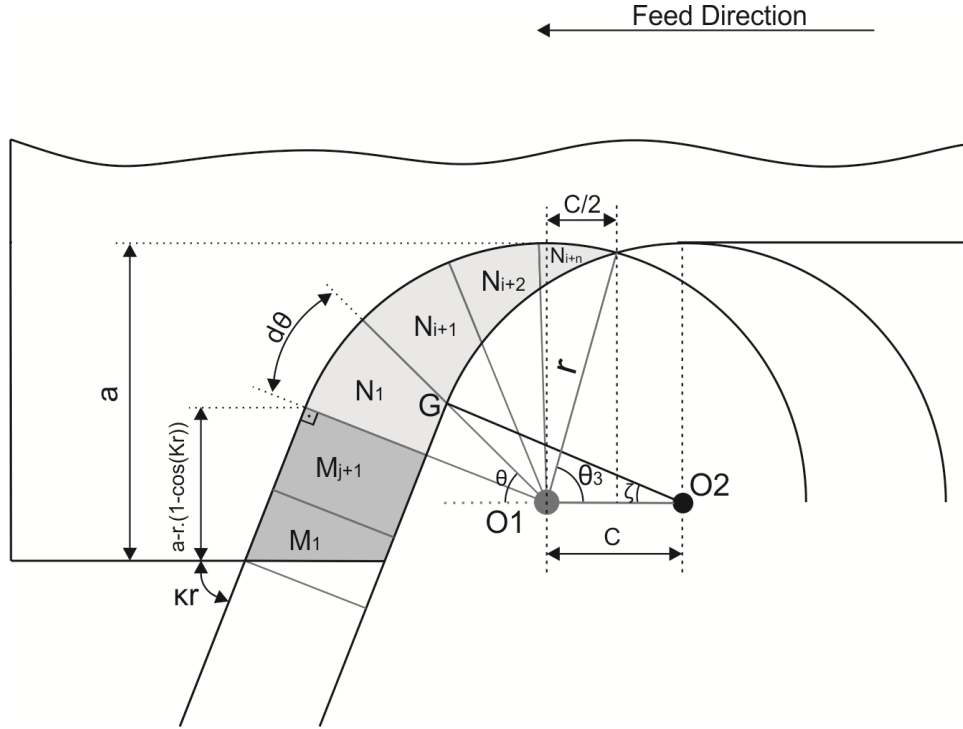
Schematic of a Turning Tool Engaged with a Workpiece When $a > r \cdot (1 - \cos(kr))$
